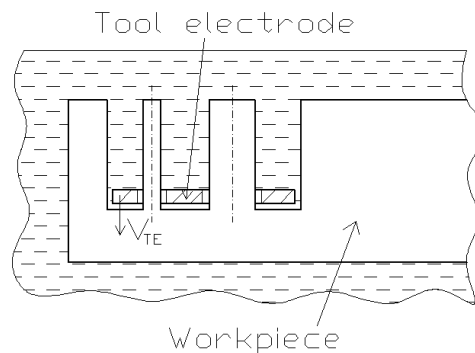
Obtaining external cylindrical surface by using two tool electrodes found in revolution motions
